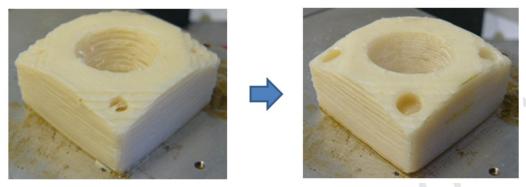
The FDM workpiece before machining (left) and after machining (right)
